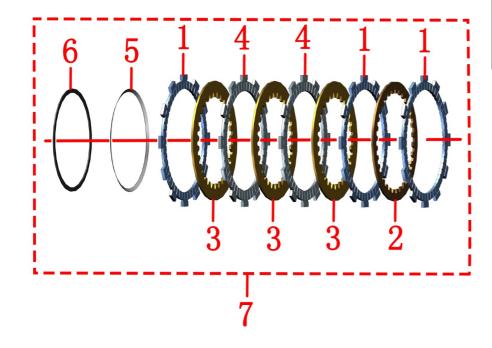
RIGHT CRANKCASE		Clutch assembly-3	CHK	40)
